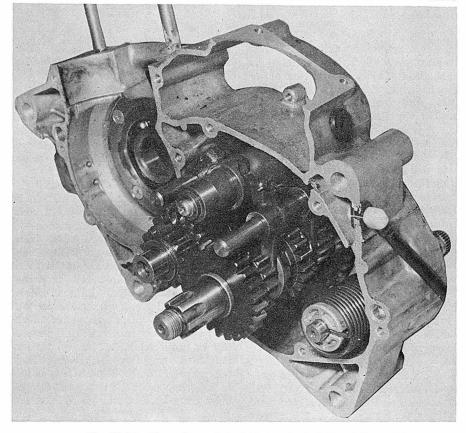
View of gear installation typical of F5 and F8 models.
